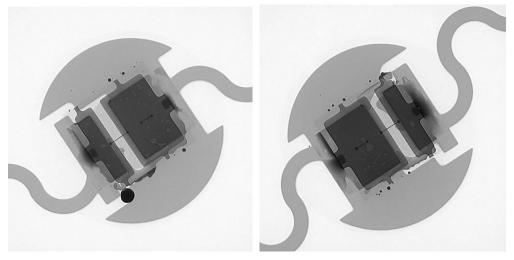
X-ray inspection of assembled components revealing shorts between bond pads.
